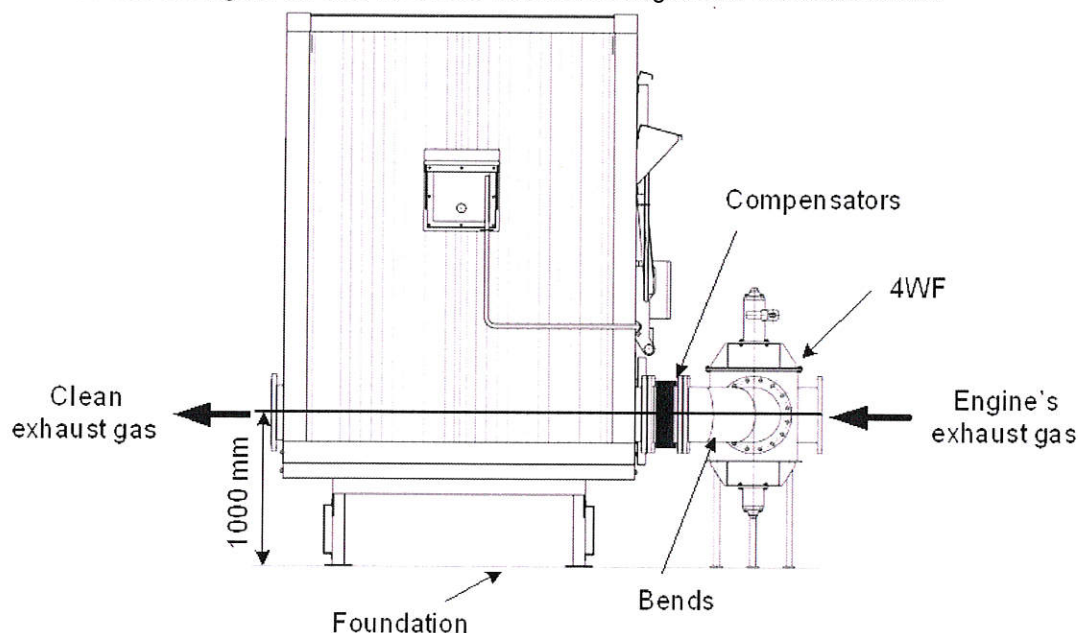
Thermal reactor housing after complete installation (e.g. J420 front view)
